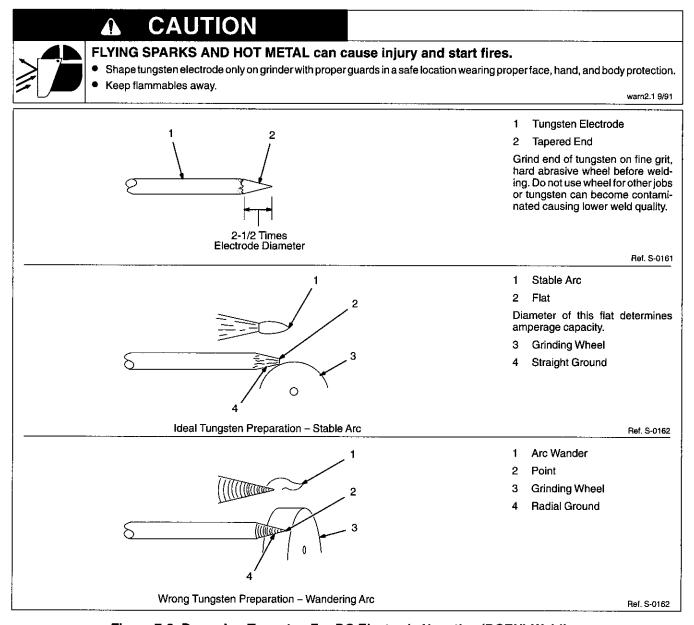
Preparing Tungsten For DC Electrode Negative (DCEN) Welding
